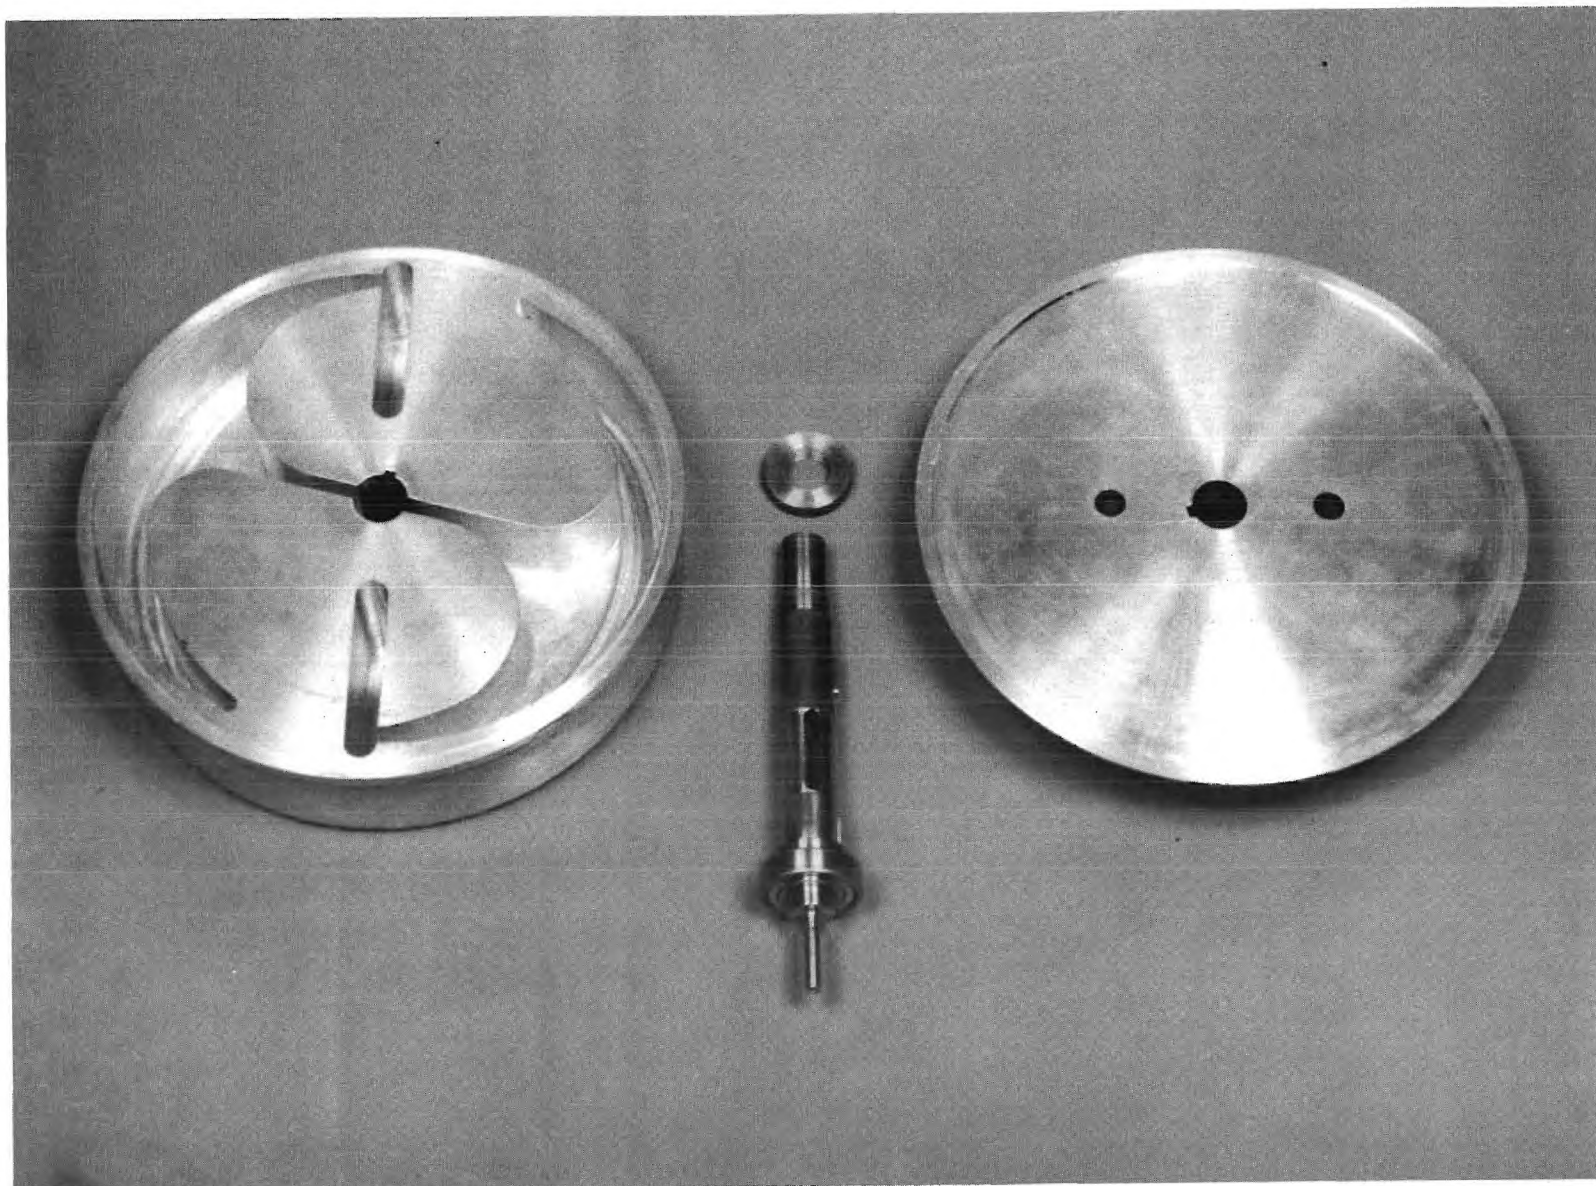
Centrifugal Classifier Rotor Assembly and Shaft.
